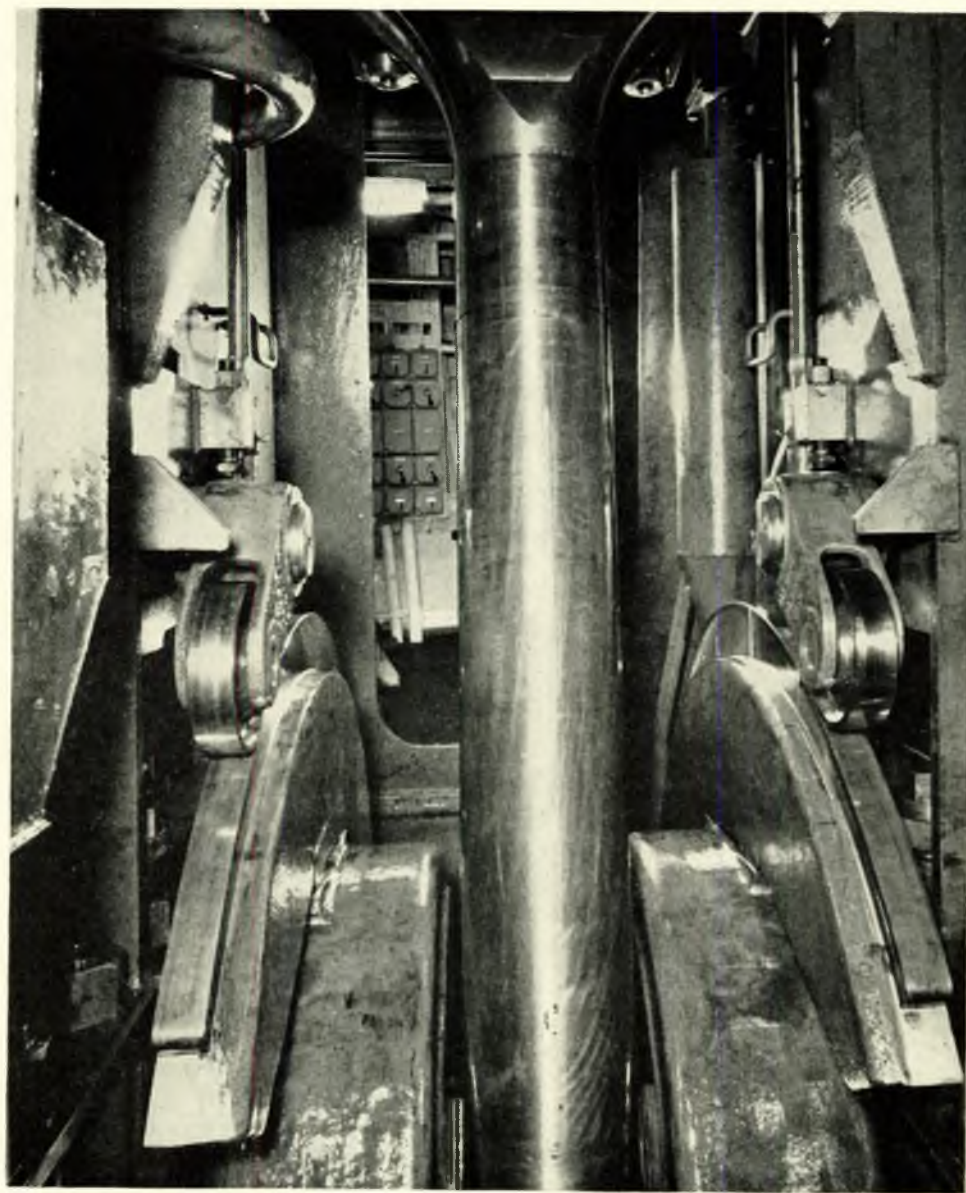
Interior view of crankcase, showing cam segments, rollers, levers and pull rods for exhaust valve
